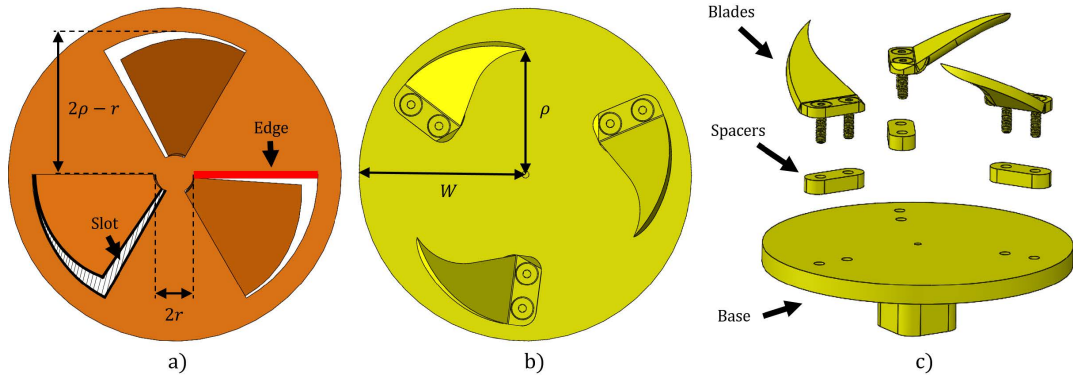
(a) Latching pattern cut from cardboard with red lines denoting engagement edges where the blades contact when fully engaged, (b) Latch assembled configuration, and (c) Components of the latch in blowout view.
